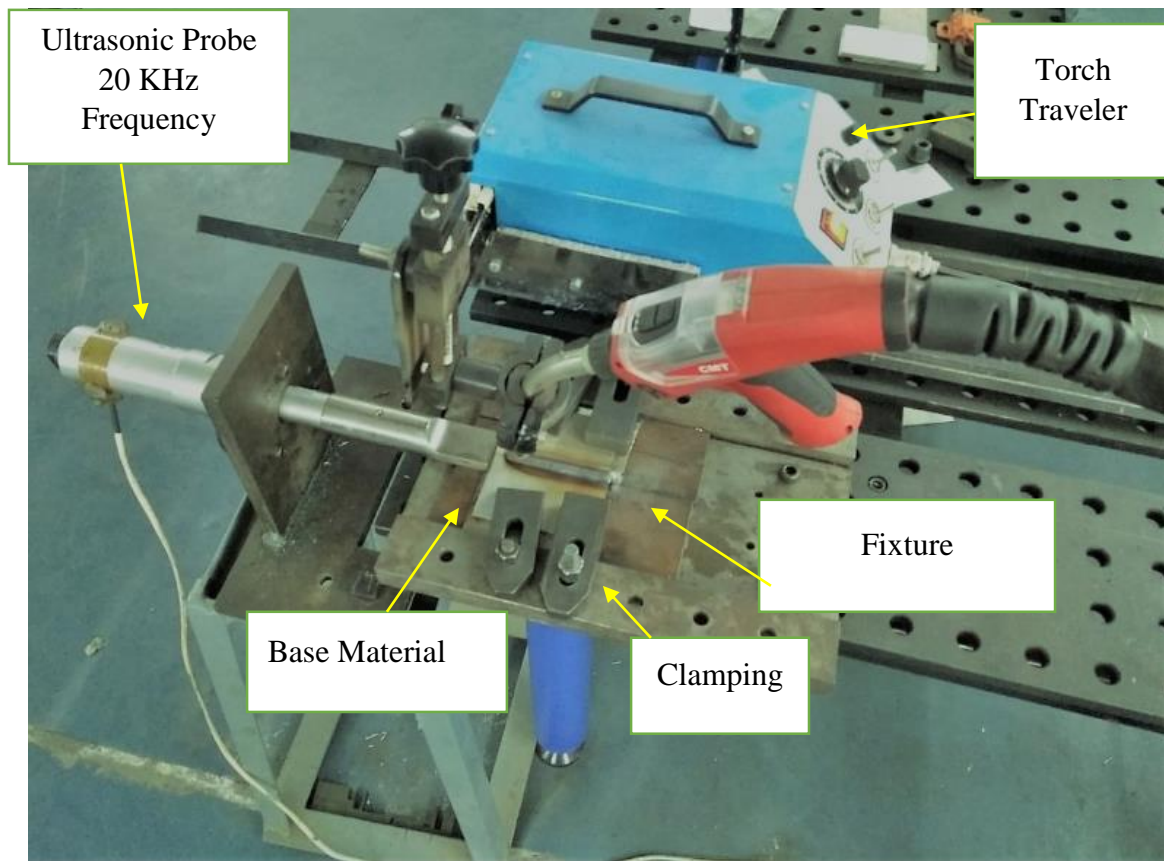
Experimental Set for Ultrasonic Assisted Cold Metal Transfer Welding
